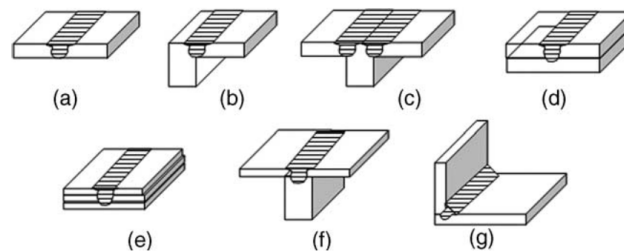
Joint configurations for FSW: (a) square butt, (b) edge butt, (c) T butt joint, (d) lap joint, (e) multiple lap joint, (f) T lap joint, and (g) fillet joint.
